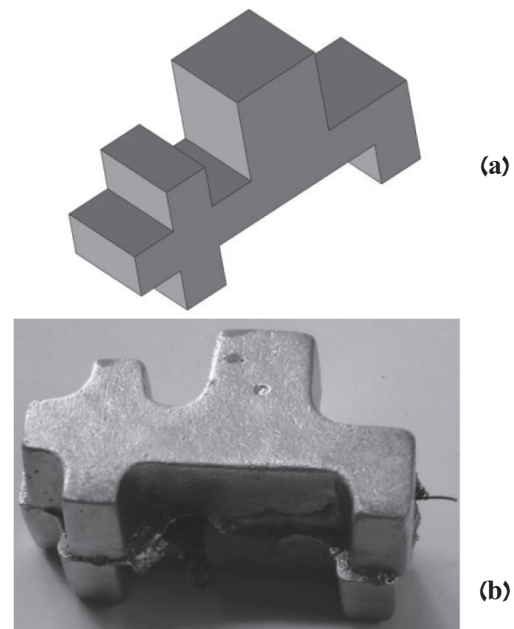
Multi-junction part, (a) CAD model, (b) casting with thermocouples.
